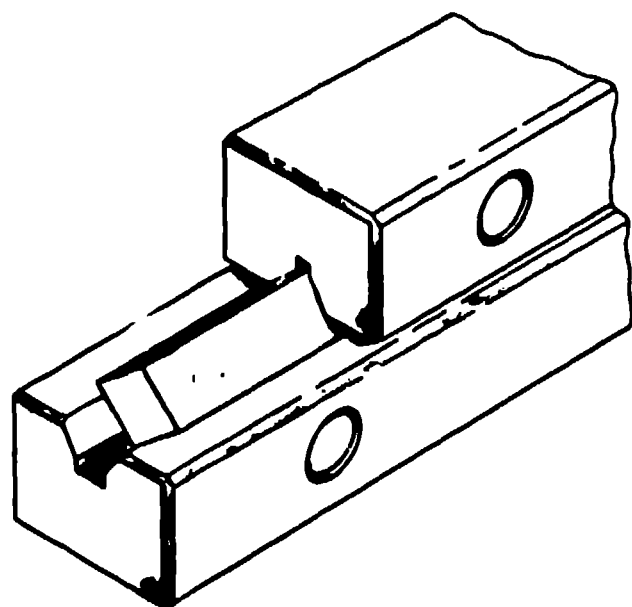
Linear bearing mechanical arrangement for Configurations 2 and 3.
